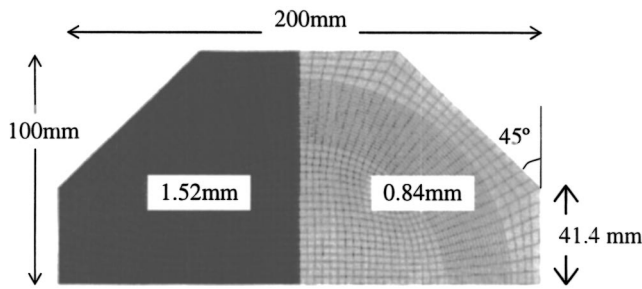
Schematic of one half of the blank used in tailor welded blank forming (Case 3)
